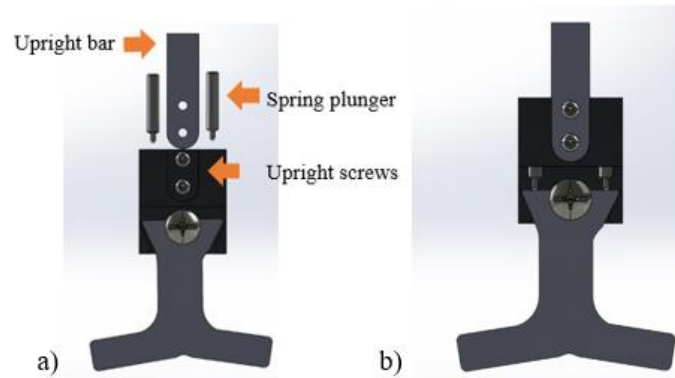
Upright bar attachment front view with components exploded (a) and assembled (b).
